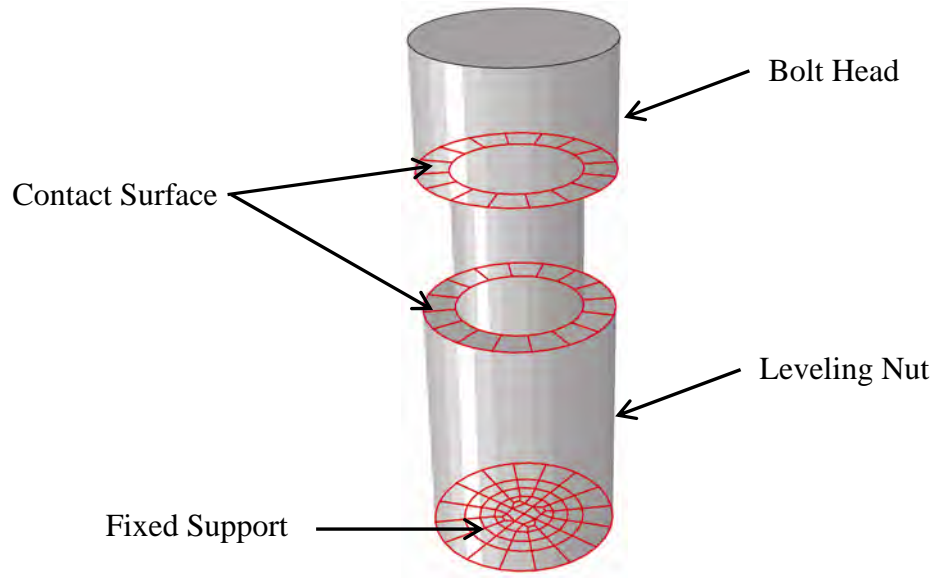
Shape of fasteners, contact surfaces, and location of fixed support
